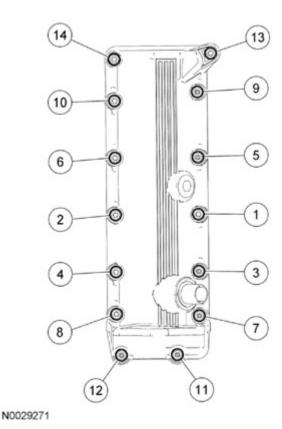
Identifying Cylinder Head Fasteners Tightening Sequence Courtesy of FORD MOTOR CO.
